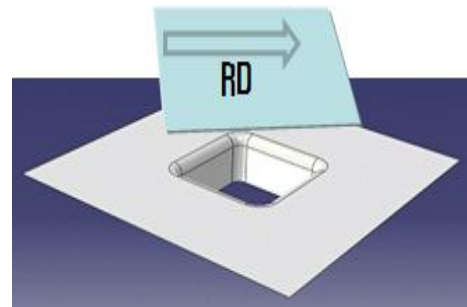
Ti-6Al-4V sheet positioning. RD is aligned to corner direction of drawing die
